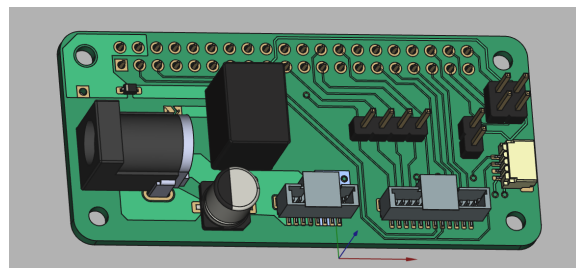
Assembled PCB and Raspberry Pi Setup
